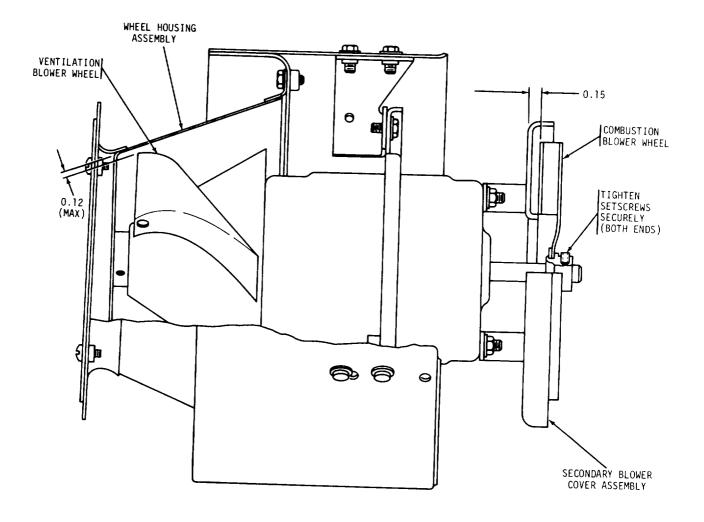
Blower assembly showing blower wheel clearance.
